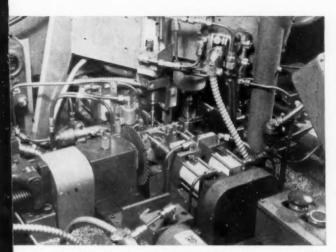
Close-up of terminal block maker showing drilling and tapping operations on rectangular stock.
